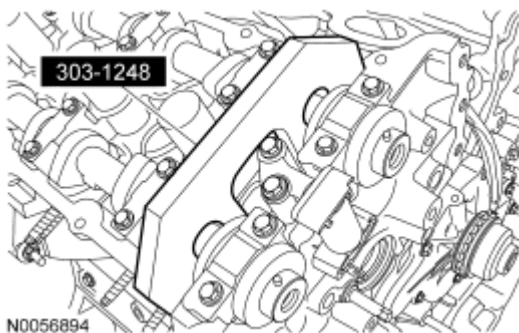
Removing Special Tool (303-1248) From RH Camshafts
